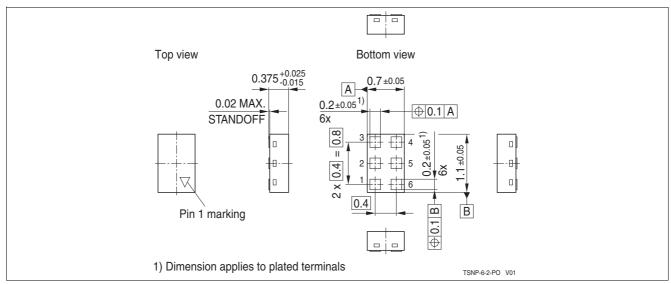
TSNP-6-2 Package Outline (top, side and bottom views)
